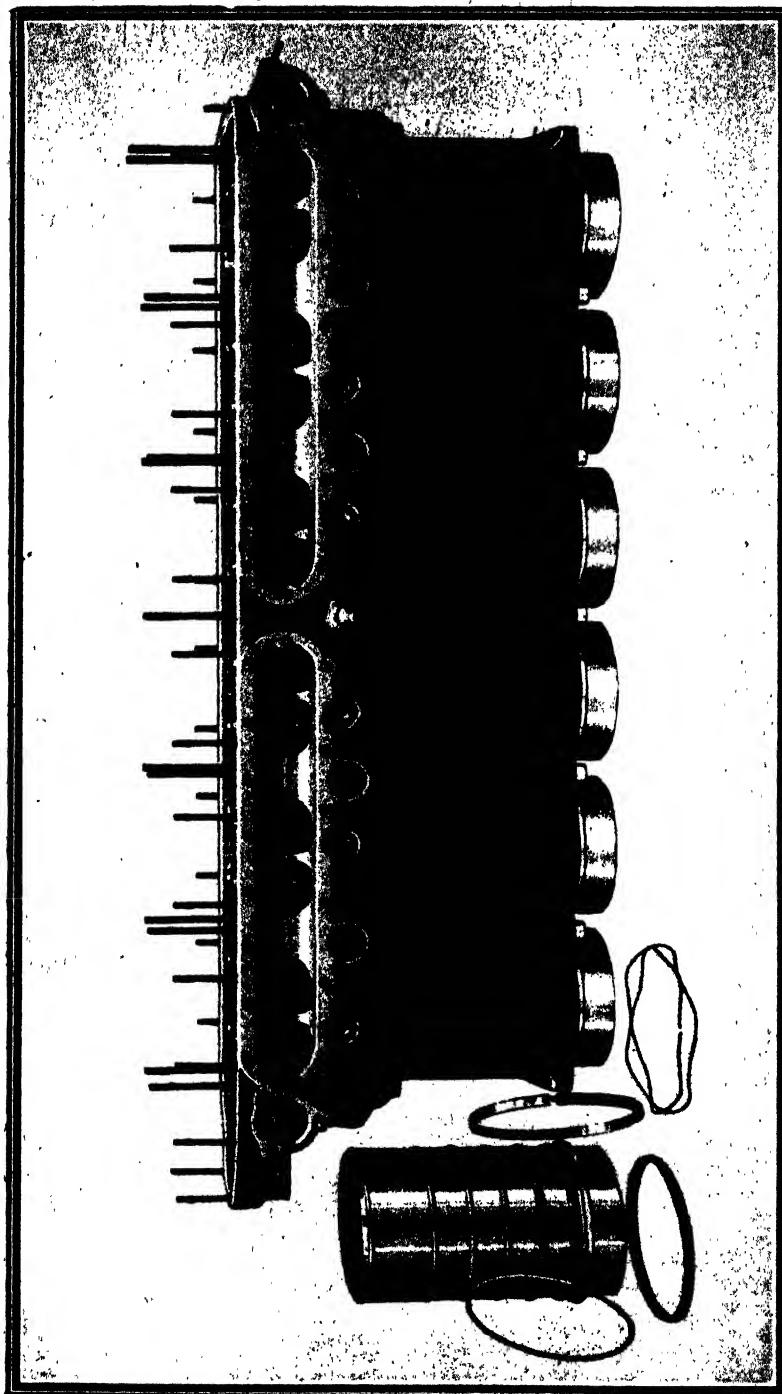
Cylinder Block and Liner with Joint and Spring Rings. (Kestrels IV. to XII.)
